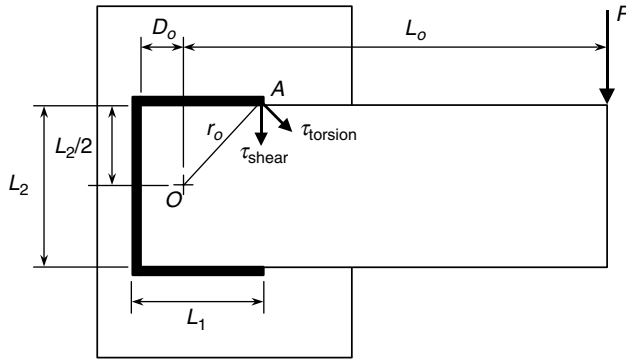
Geometry of fillet welds as lines in torsion.
